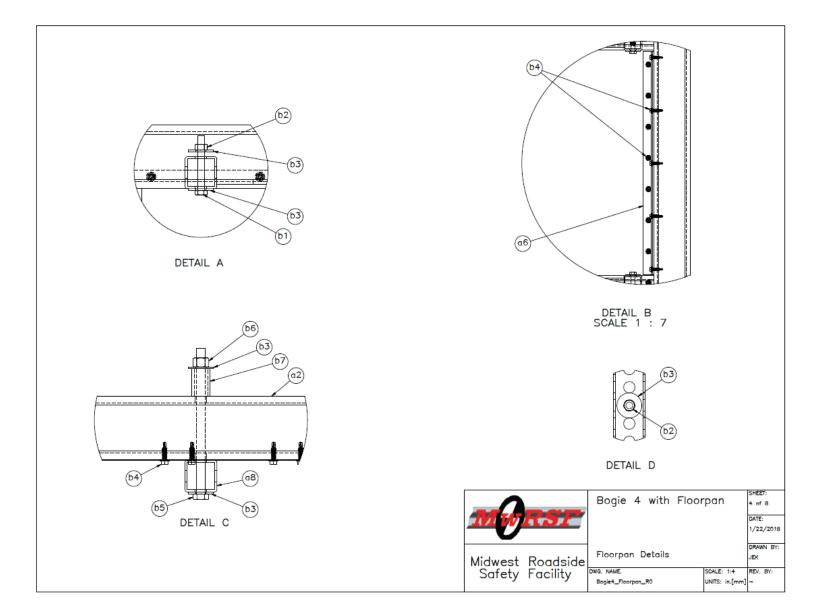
Floor Pan Details, Test Nos. MWPFP-22 through MWPFP-26
